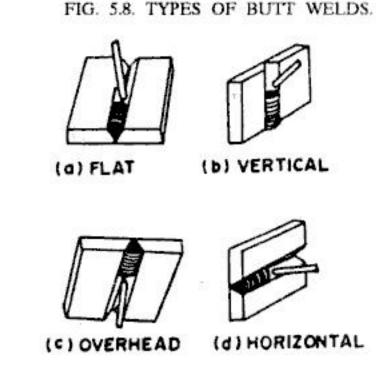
POSITIONS FOR WELDING : BUTT WELDS
